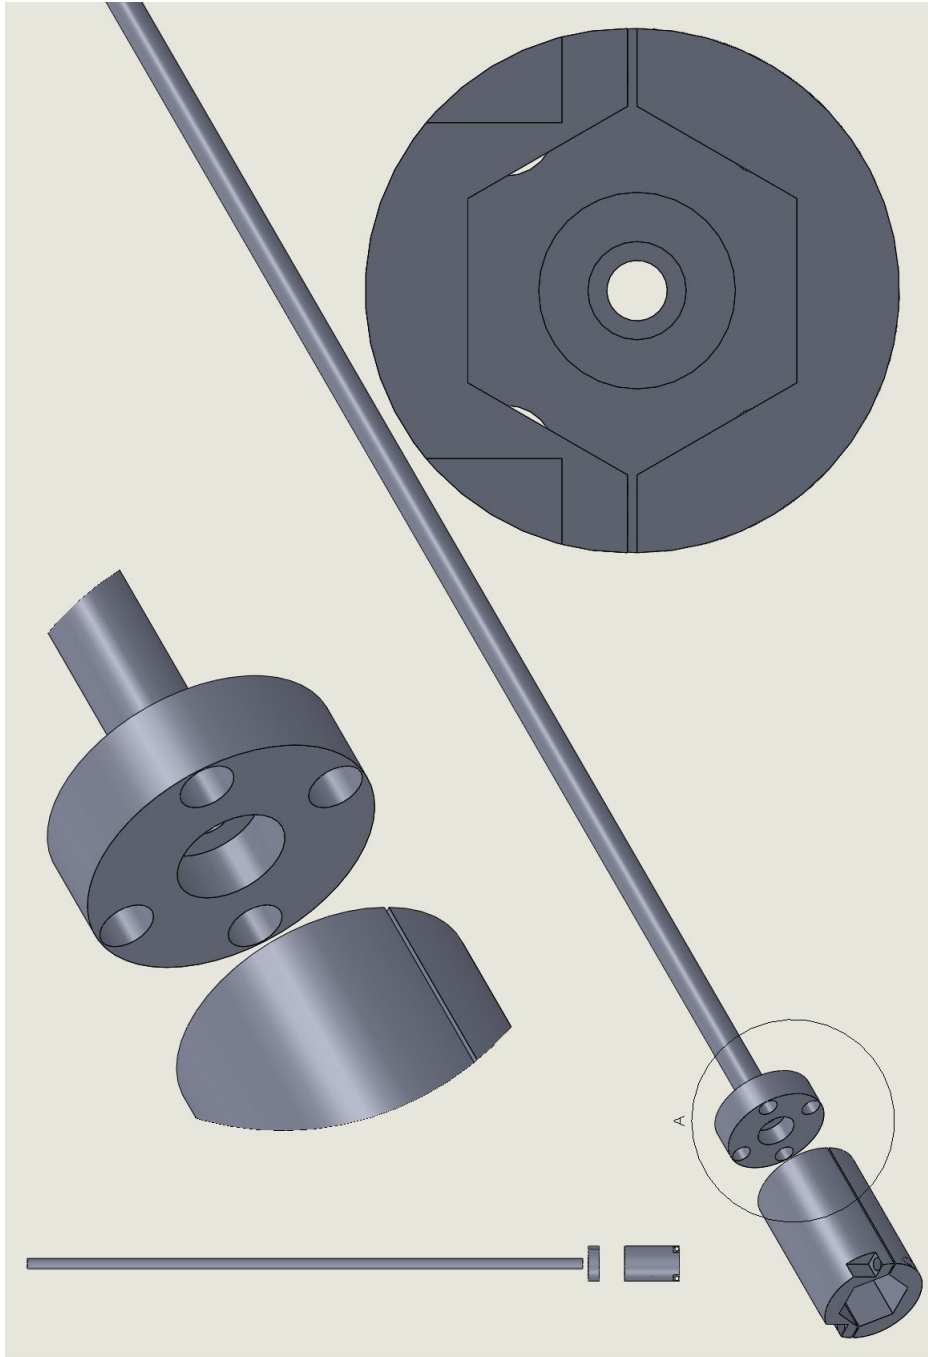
Depiction of the clamp setup used to draw each of the stack designs pictured in Figure B.1. There were four separate pieces: 1) Bottom clamp; 2) Top Clamp; 3) Combining piece; 4) Handle rod. By using this clamp design, we were able to utilize an entire preform while it remained in the furnace. This was useful because there is a large temperature difference between the outside atmosphere and the inside of the furnace. If this was not controlled then the preform could experience thermal shock.
